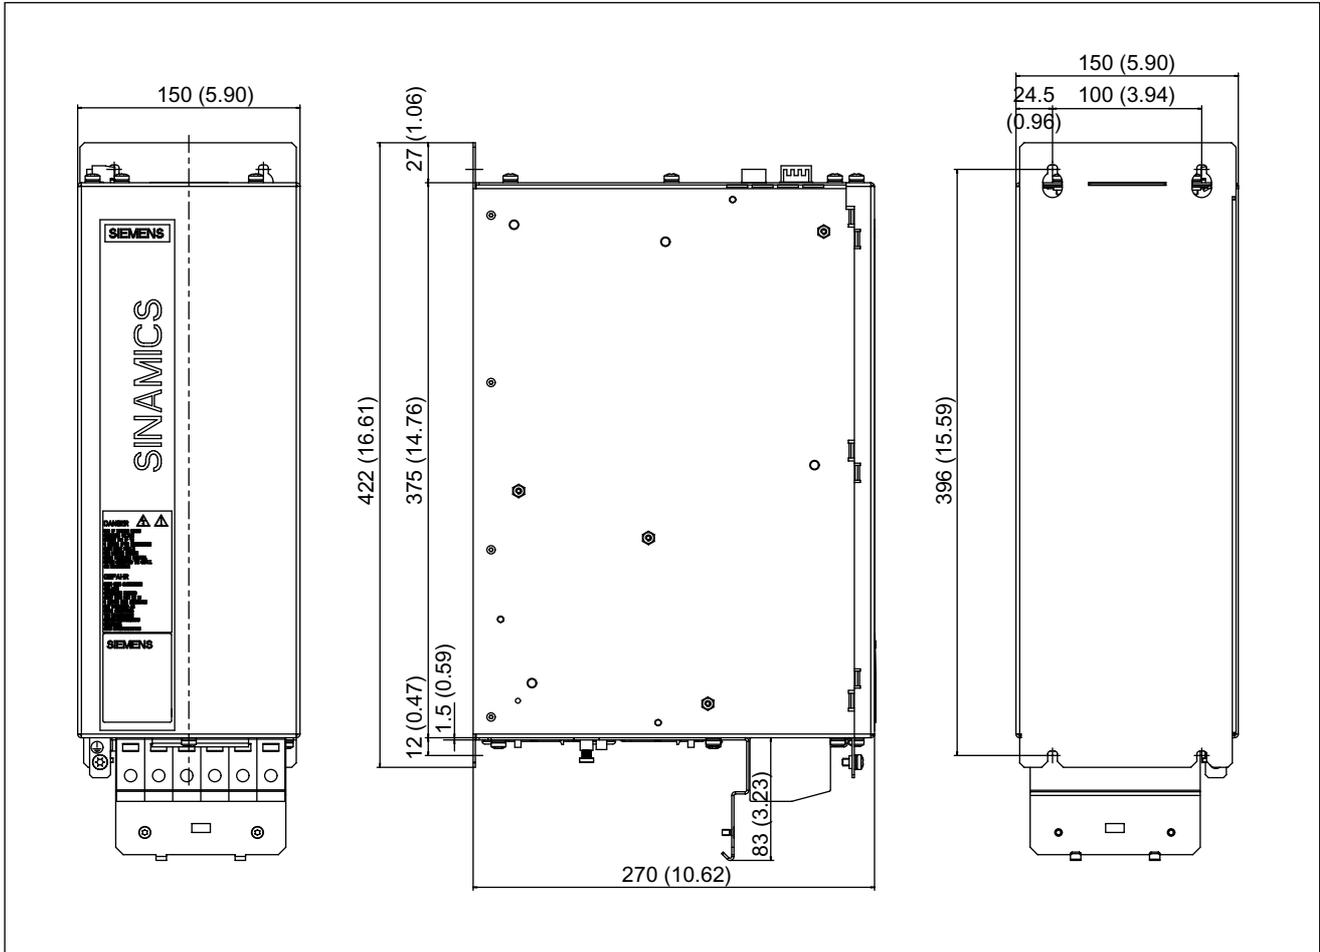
Dimension drawing of Active Interface Module 36 kW, all dimensions in mm and (inches)
